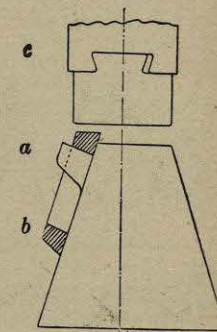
Hammering Tire Blank.—a, Bitt on anvil; b, tire blank; c, head of hammer.
